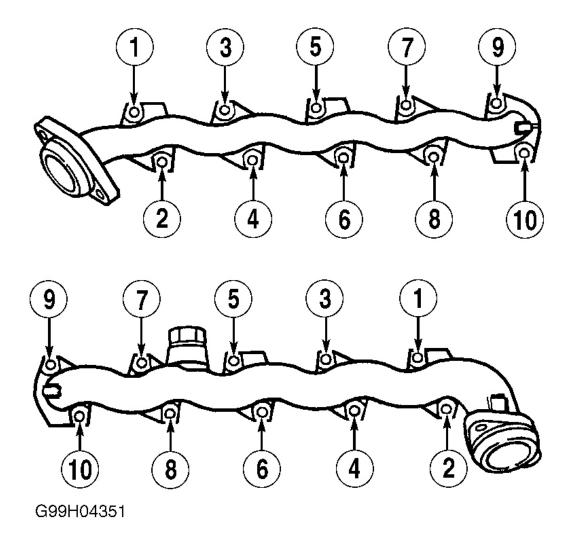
Exhaust Manifold Bolt Tightening Sequence Courtesy of FORD MOTOR CO.
